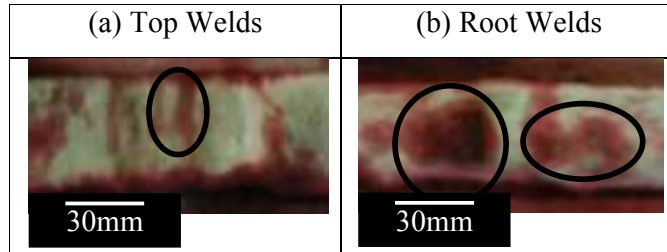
Liquid Penetrant Inspections of Specimen 2
